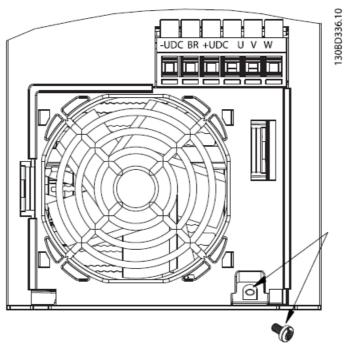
Removing Fan Screw on Enclosure Size K3
